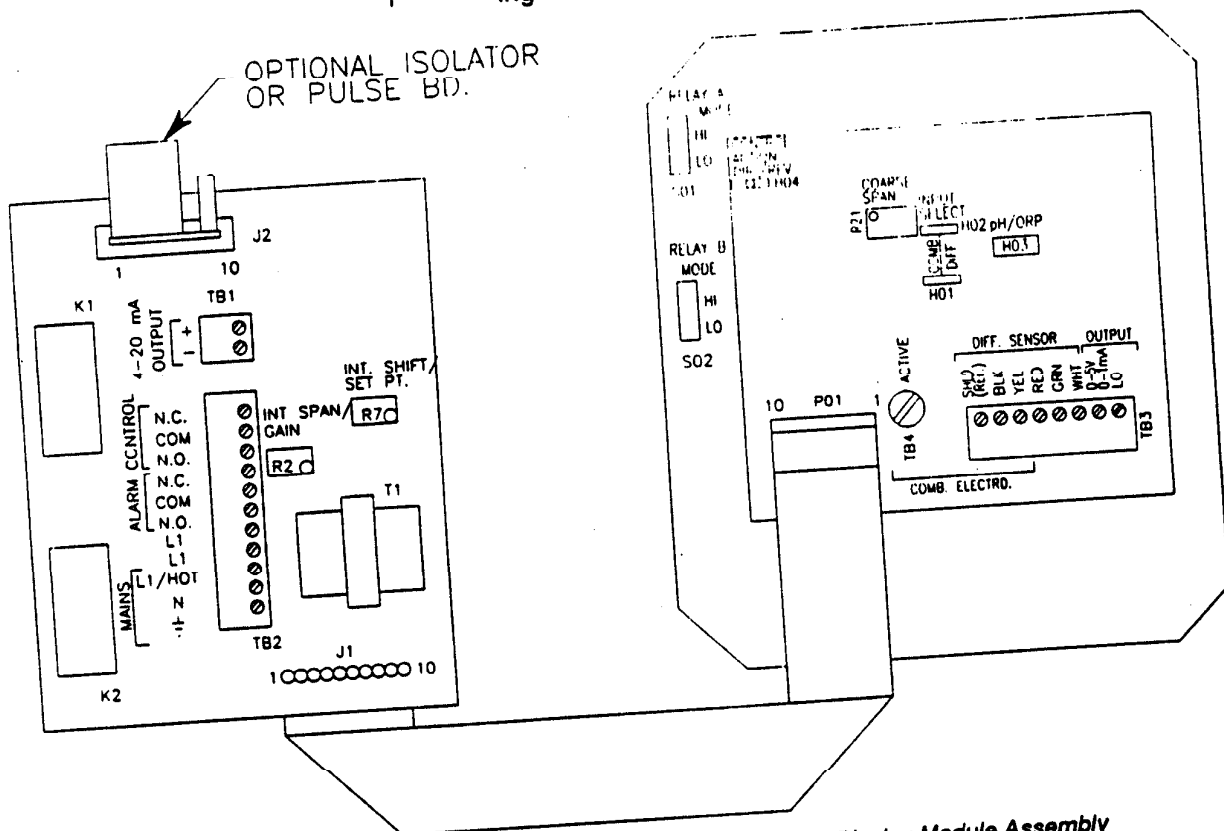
Controls On Power-Supply Board, Backside of Display Module Assembly And Electrical Hook-up Details
